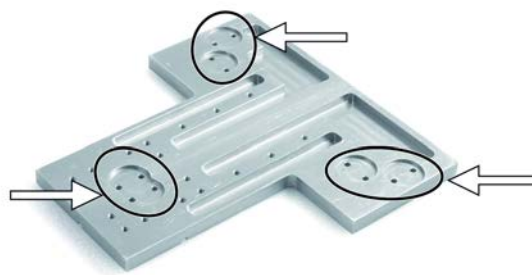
Bottom side of the moving platform, markings indicate the positions of the counter-sunk holes for affixing to the carrier plate
